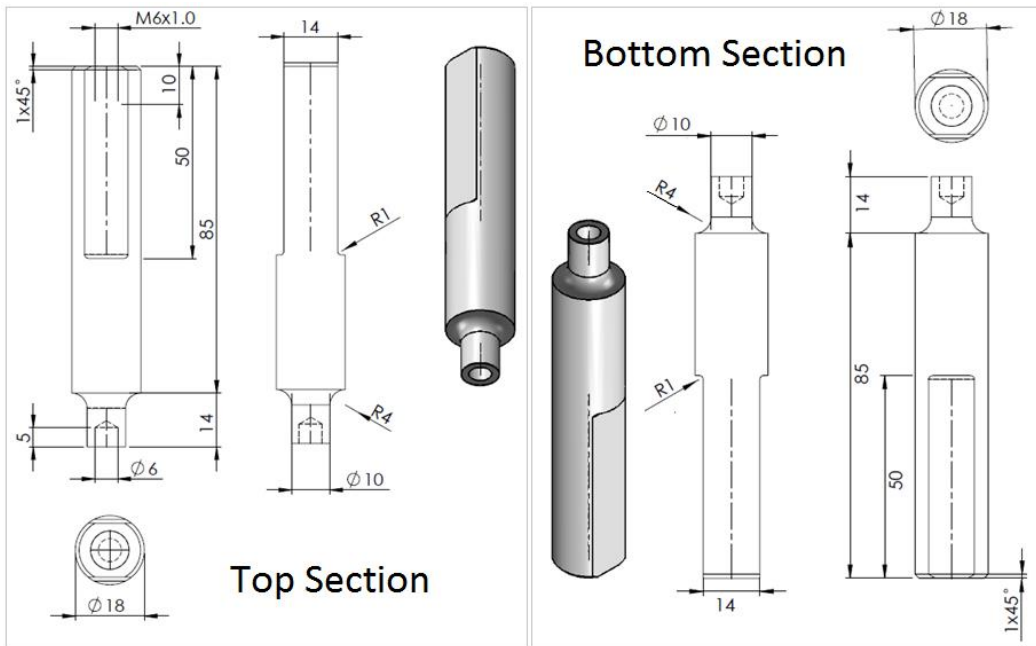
Drawing and schematic demonstration of the top and bottom sections of the hot tensile test specimen.
